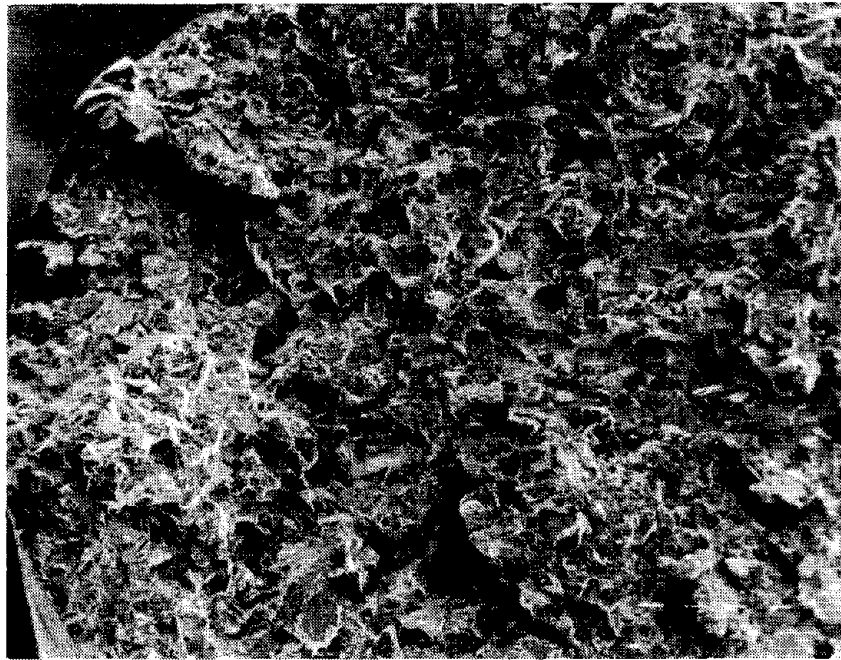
FRACTURES OF TENSILE SPECIMENS FROM THE WELD METAL.
